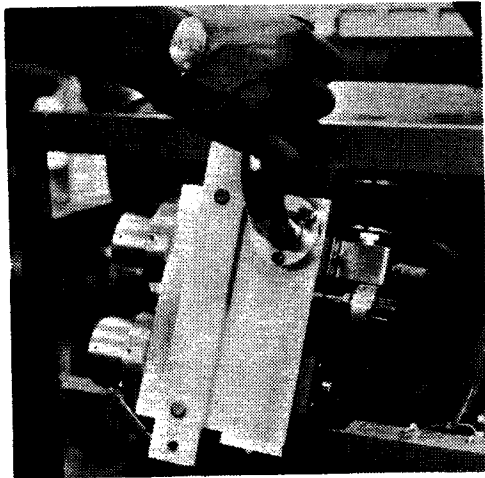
Lifting Valve Block Assembly Clear of Frame
